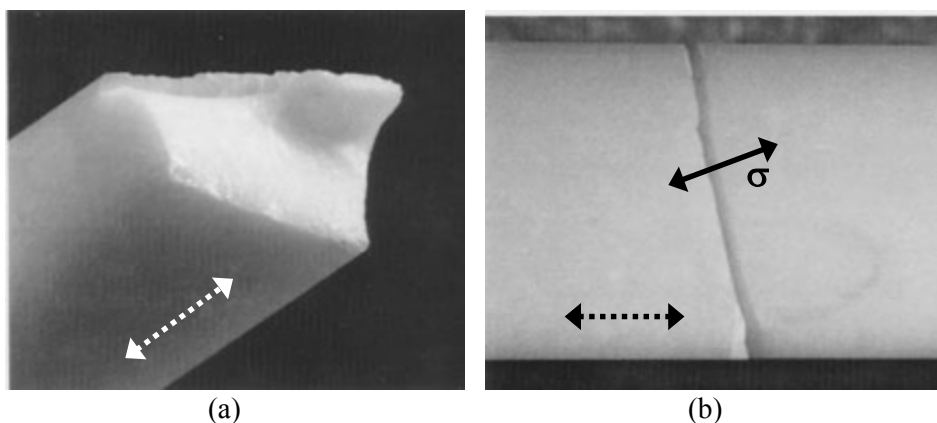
A twisted fracture surface in a misaligned alumina bend bar in a fixture that did not articulate properly. (a) shows the fracture surface, and (b) the tensile surface of both halves. The principal stress direction (solid black arrow) was 14 degrees off the expected direction (dotted arrows). Twisted or angled fracture planes should prompt the tester to check the fixture articulation and specimen alignment procedures.
